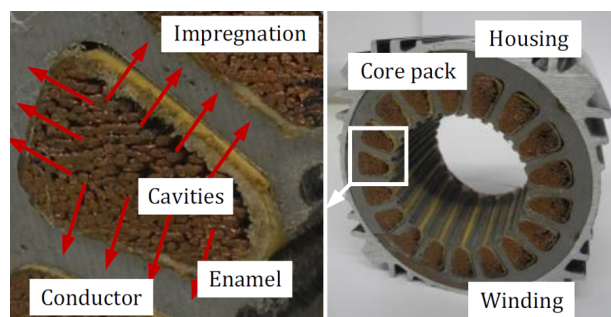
An example of typical low-voltage stator winding assembly (red arrows indicate schematically heat transfer path from the winding body to the machine periphery/housing)
